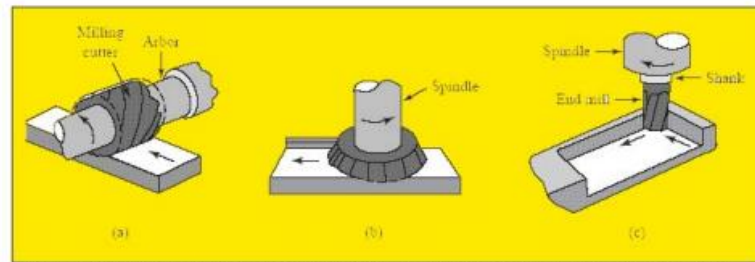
The three basic milling operations: (a) milling, (b) face milling, (c) end milling
